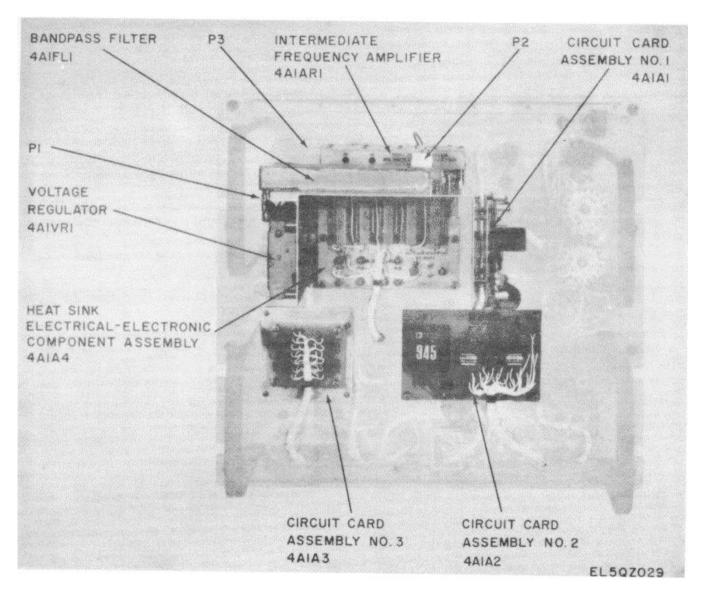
RF Modules Test Facility Front Panel, Rear View.
